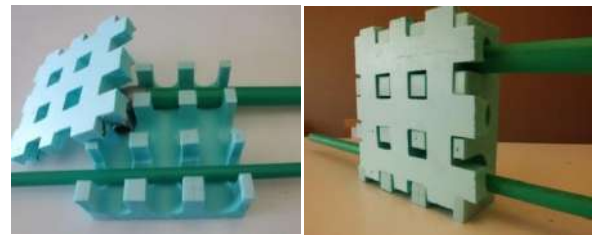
Component manufactured XPS (CNC hotwire cutter 2D)
